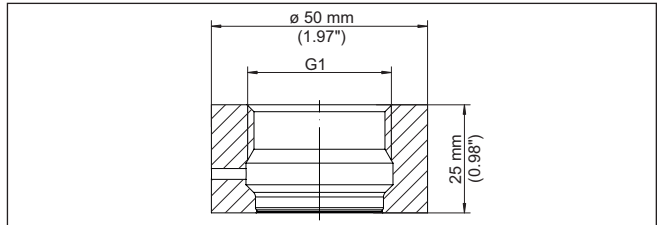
Dimensions welded socket G1 (ISO 228-1) - O-ring seal
